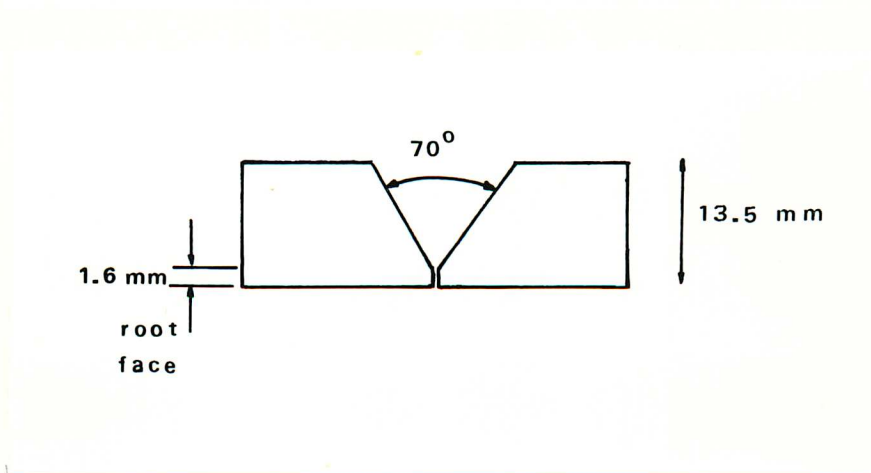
Joint preparation for tungsten inert gas welding process (TIG).
